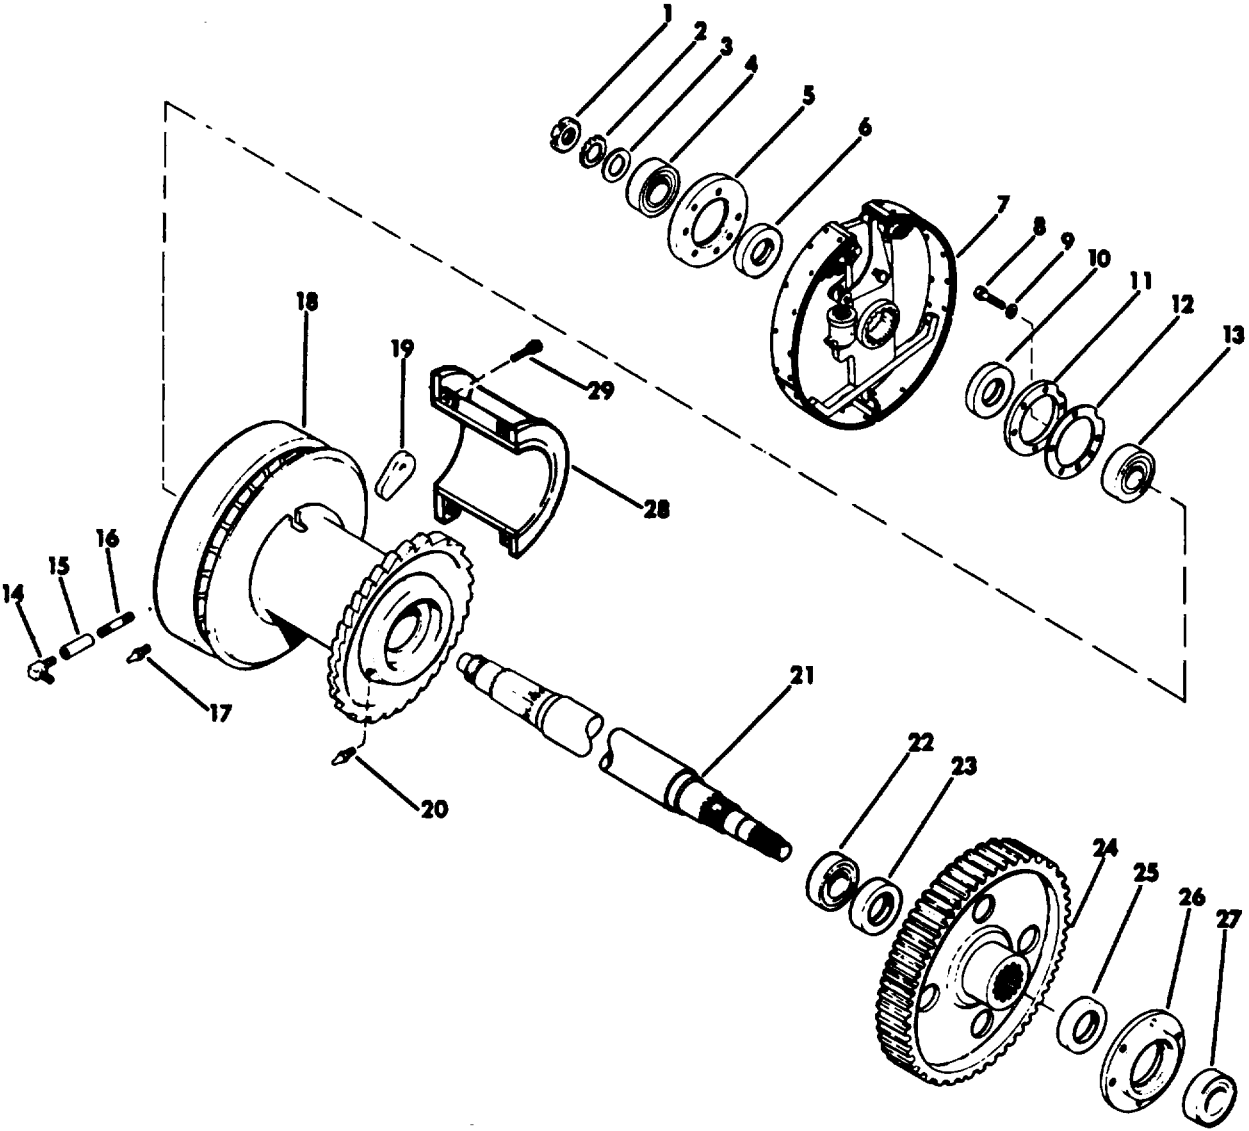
Rear drumshaft assembly, exploded view. (Sheet 1 of 2)
